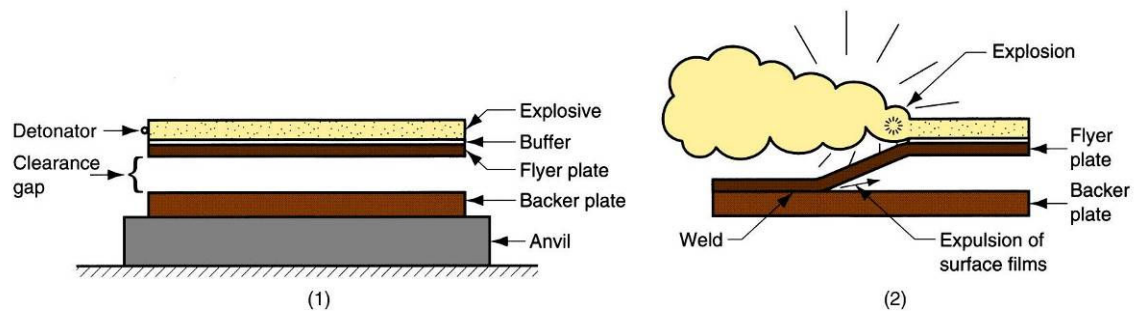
Parallel way of assembly of welded materials [4]
